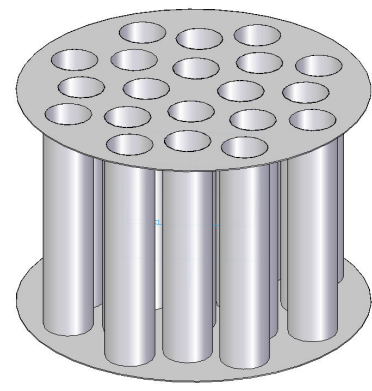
c. Insert with 20 pieces of $\text{\O}40$ mm tubes
